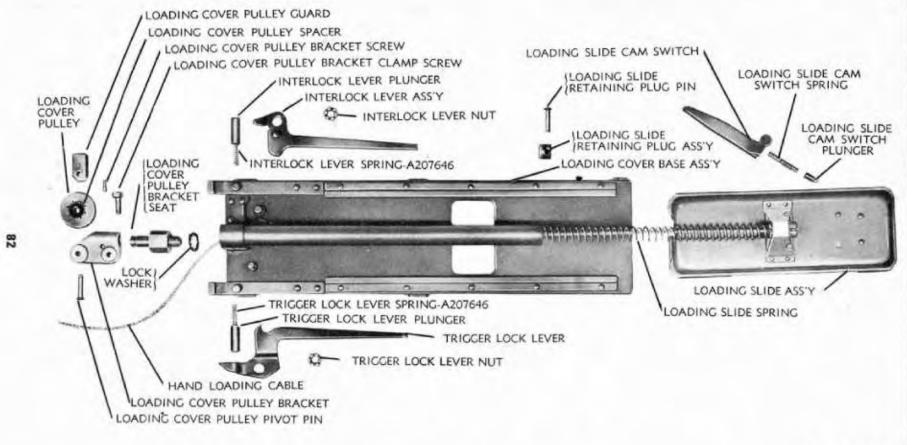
Parts of Loading Cover and Slide Assemblies (Gun M10)
